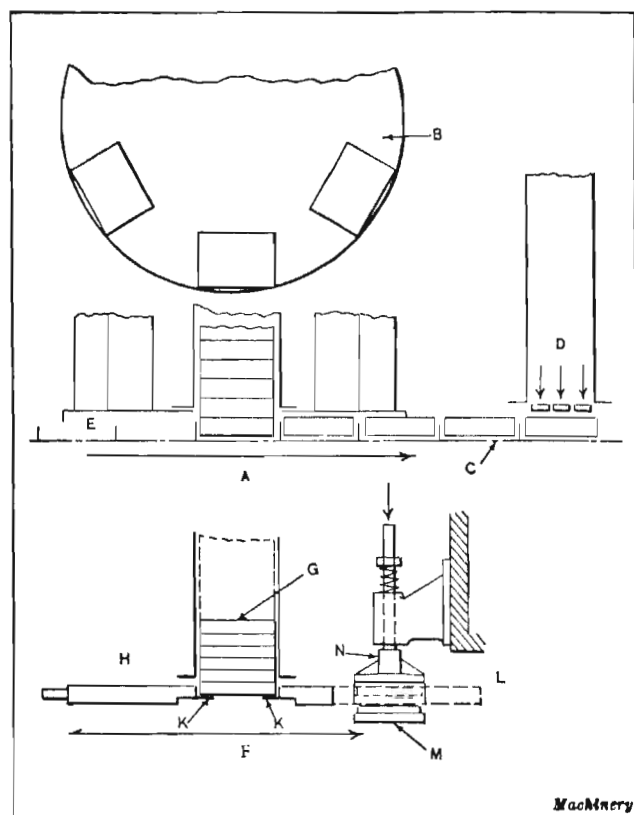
Feeding the Boxes Into the Machine and Putting on the Covers
